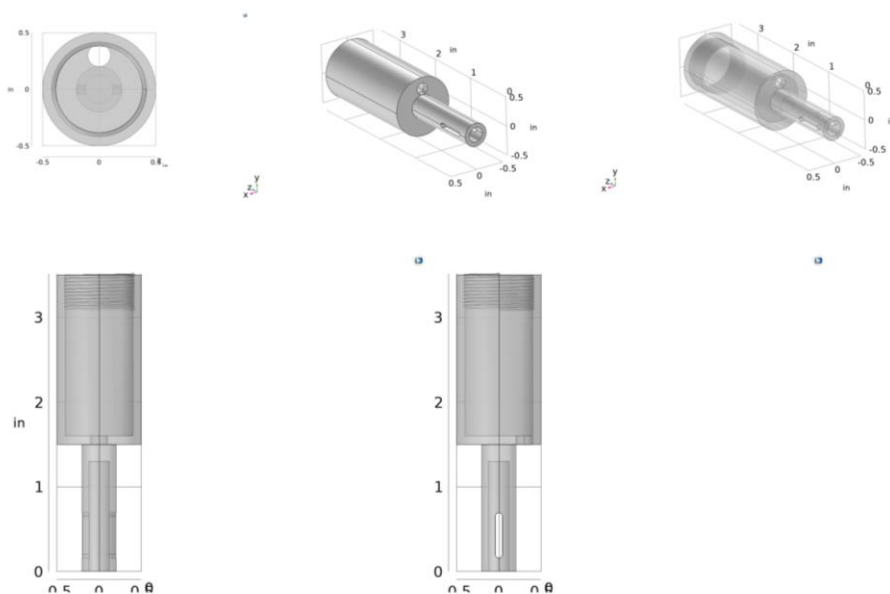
multi views of part(2): customized part connecting adapters(8) and g10 rod(4) or hollow stainless steel rod(3).
